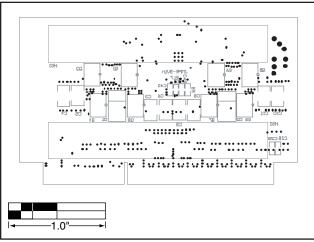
MAX5037 EV Kit Component Placement Guide—Solder Side
